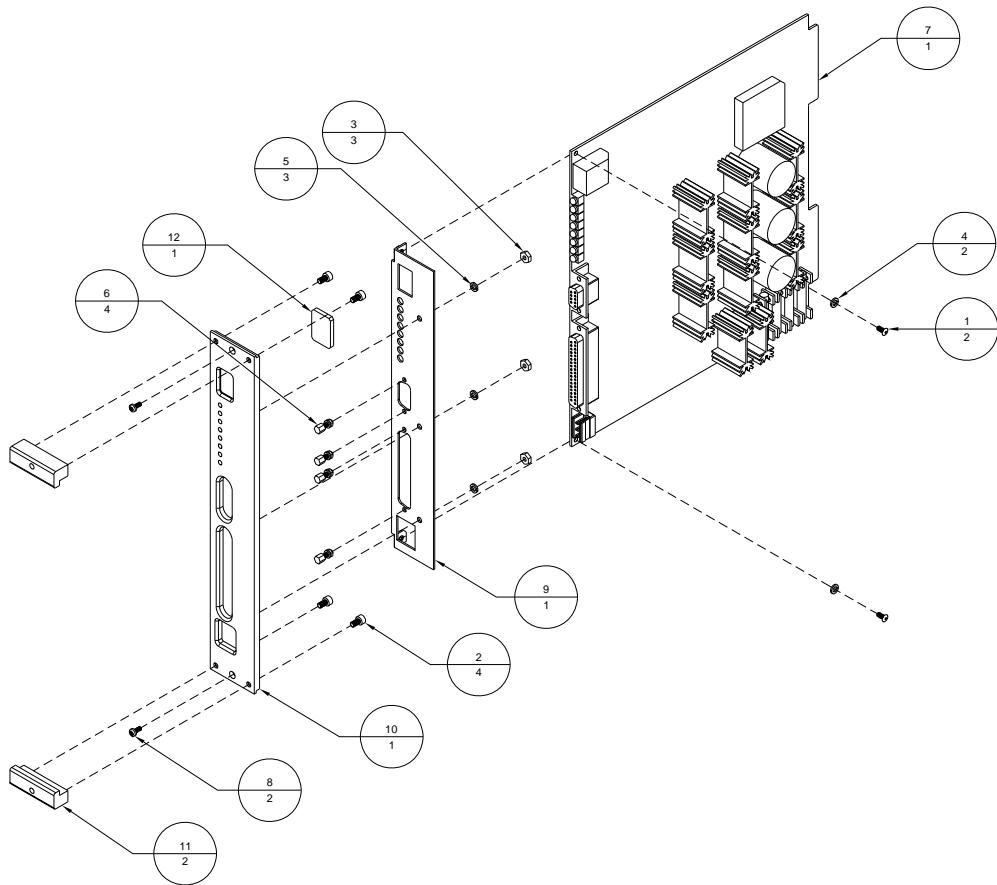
BK-HCC-1A – Head Control Card Assembly
